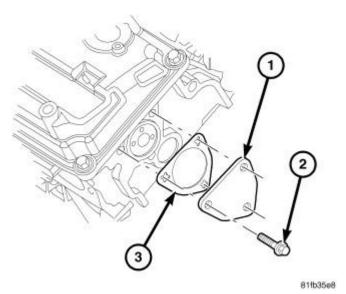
Camshaft, Rocker Arm Assembly & Cylinder Head Courtesy of CHRYSLER LLC
